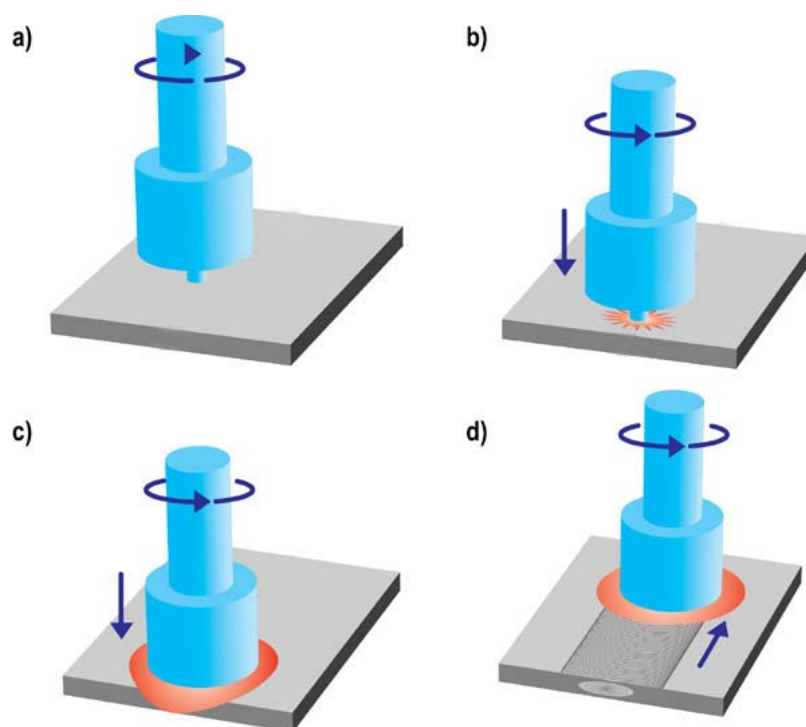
Schematic illustration of friction stir processing: a) rotating tool prior to contact with the plate; b) tool pin makes contact with the plate, creating heat; c) shoulder makes contact, restricting further penetration while expanding the hot zone; and d) plate moves relative to the rotating tool, creating a fully recrystallized, fine grain microstructure.
